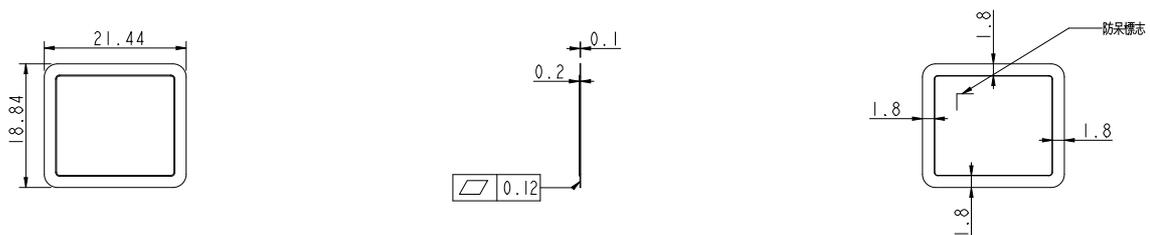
5G M.2 Data Card MV31-W bottom shield dimensions
